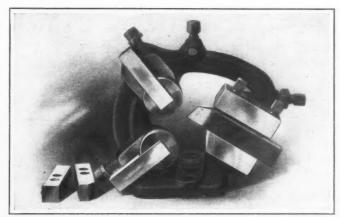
Standard Type of Turner for Use on Gridley Automatic Turret Lathe
